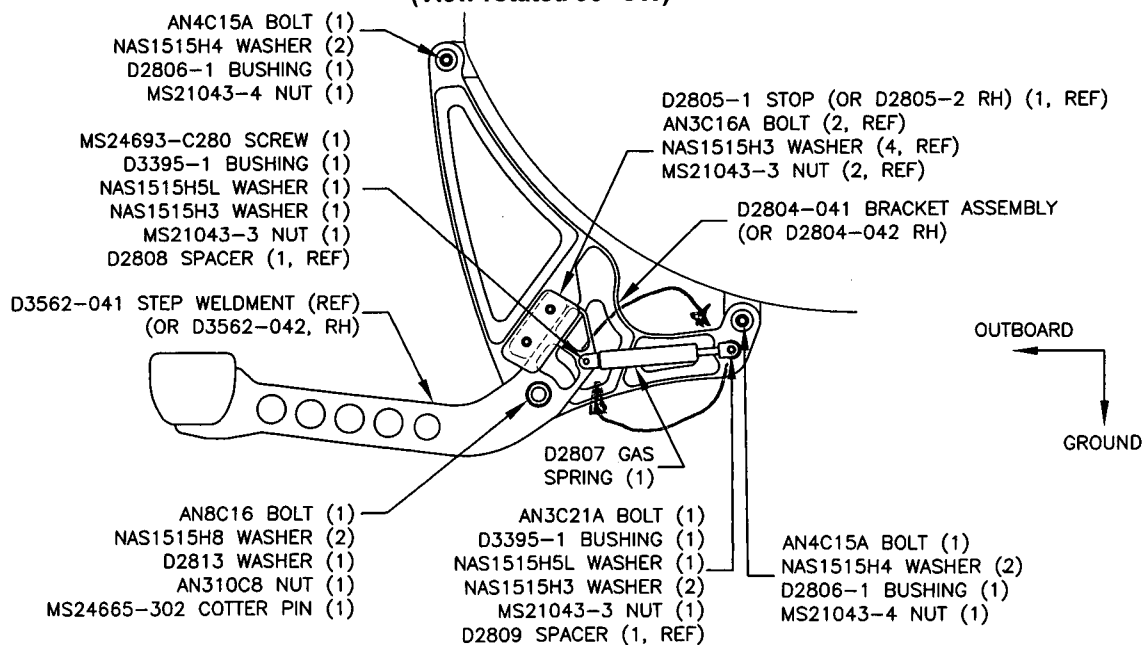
Strut Detail for D412-630-023/-024 *Heli-Access-Step*™ Installation
